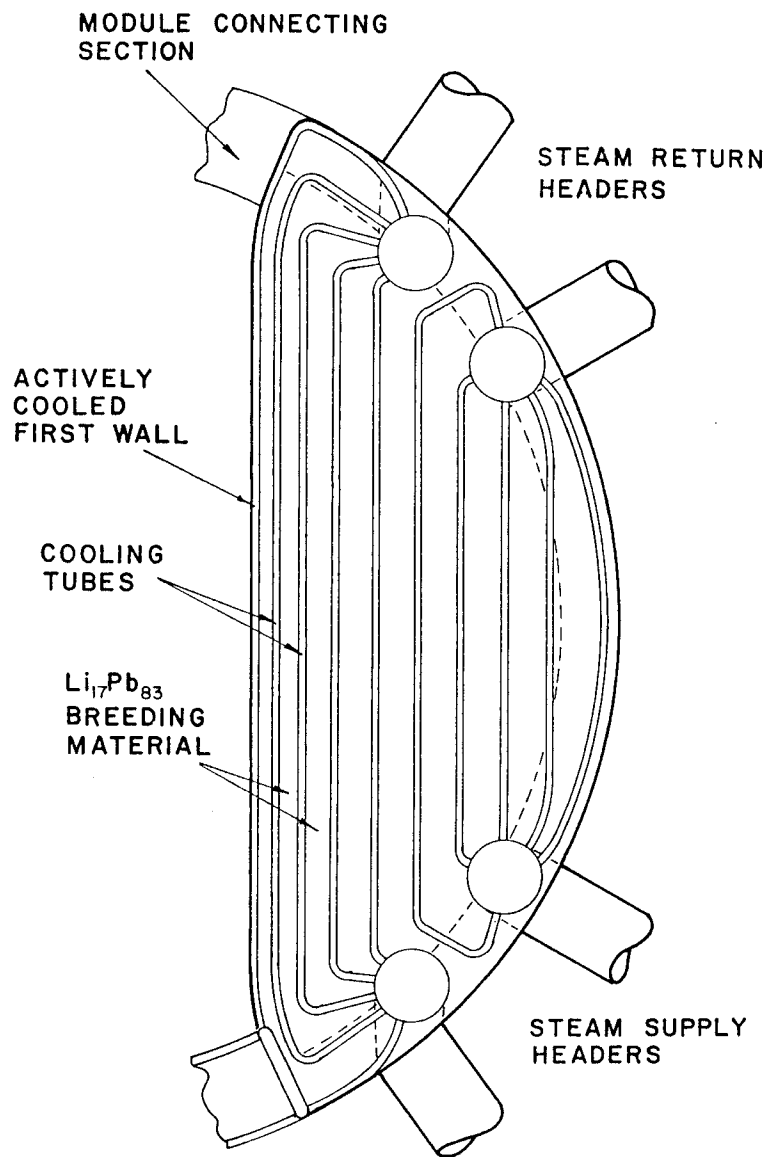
Cross section of the largest blanket segment showing steam headers.
